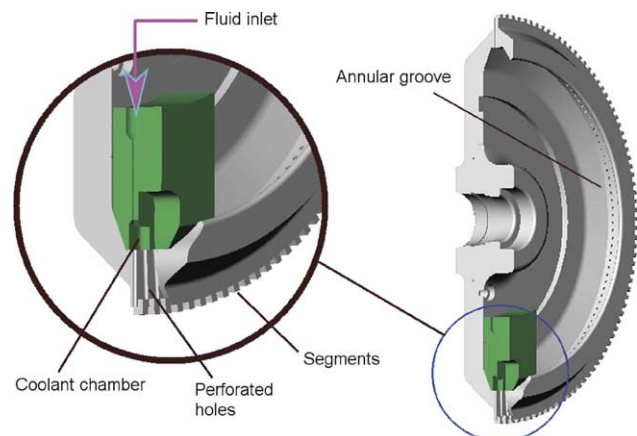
Section view of the segmented wheel/fluid chamber assembly.
